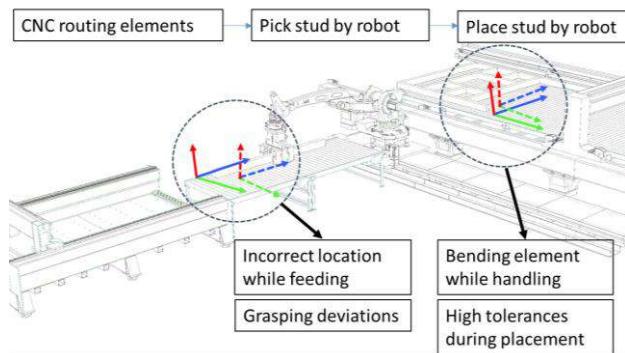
Scheme for a fully robotized assembly of prefabricated timber frames
